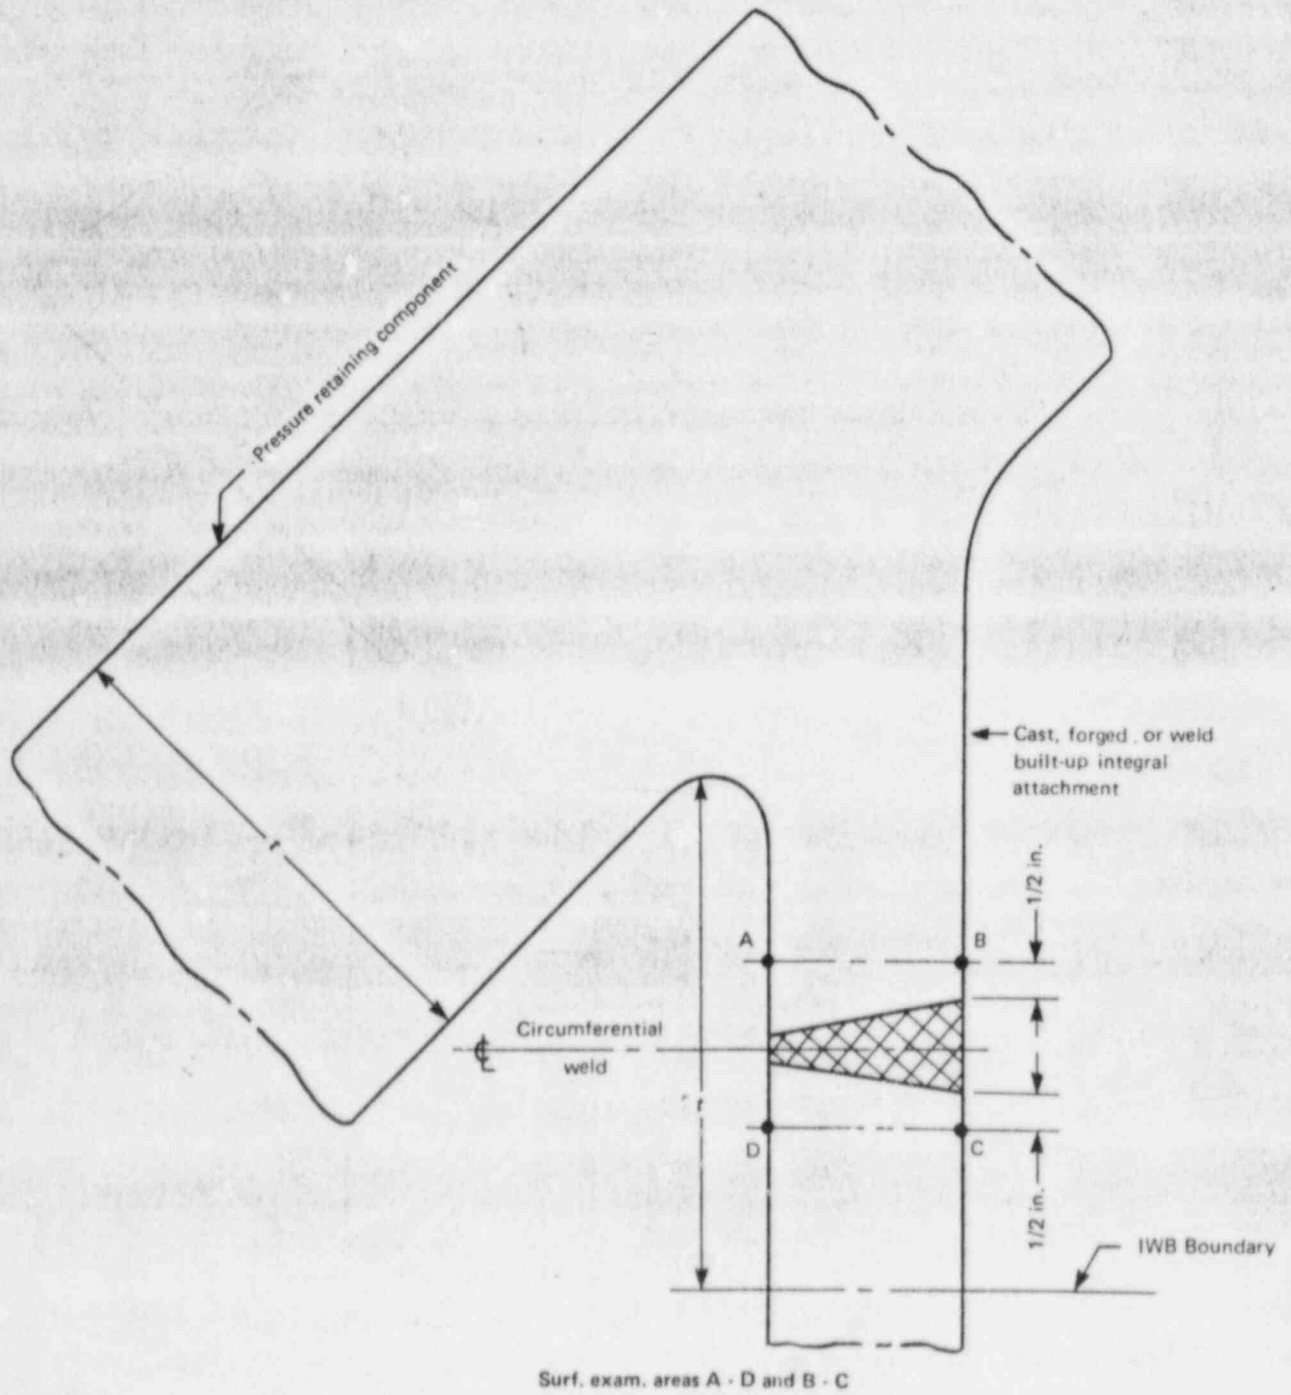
PIPE BRANCH CONNECTION
